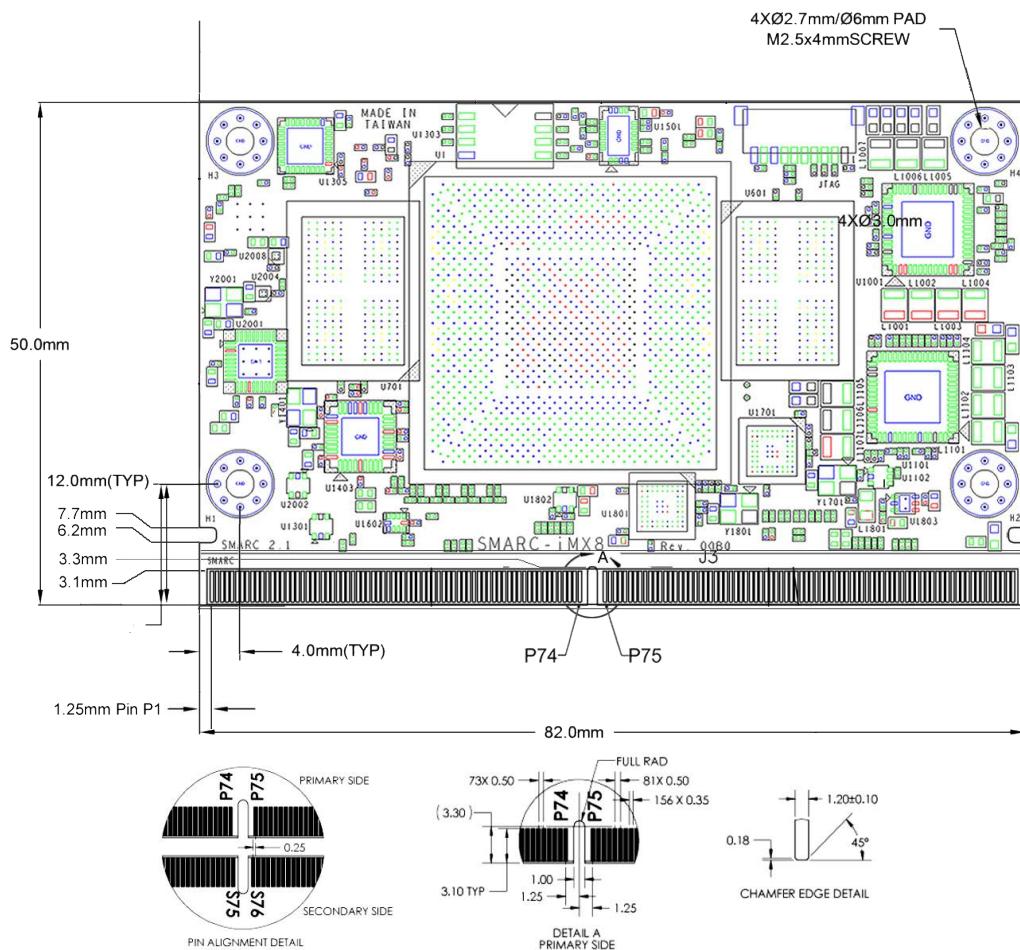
SMARC-iMX8 Mechanical Drawings (Top View)
